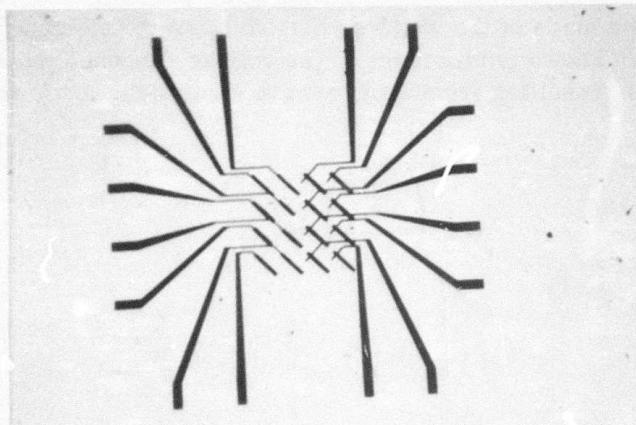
Fingers on fan-out connector strips before photoresist removal.
